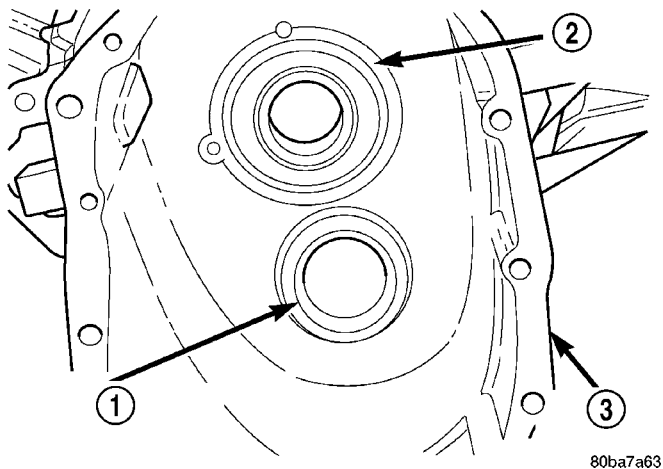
INPUT SHAFT/COUNTERSHAFT BEARING
